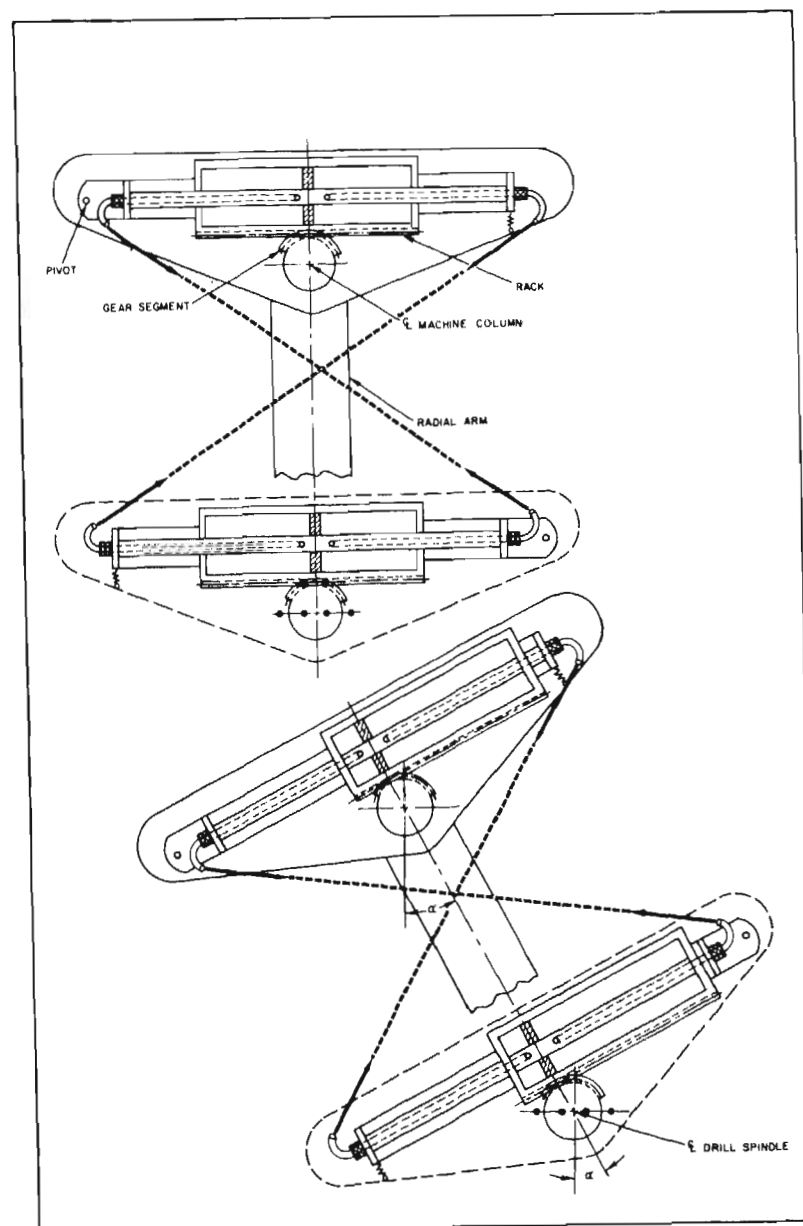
Spindle located on arm is prevented from rotating by two hydraulic cylinders.
